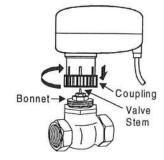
Mounting the VA-7450 onto a VG5000 Valve
